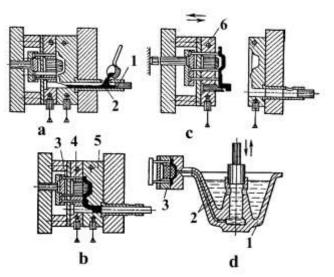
Plunger machines with cold (a, b, c) and hot (d) pressing chambers: a...c: 1- plunger; 2 – pressing chamber; 3 – pusher; 4 – metallic core; 5 – removable half-mould; 6 – irremovable half-mould; d: 1 – heating crucible; 2 – metal-conductor; 3 – press-mould
